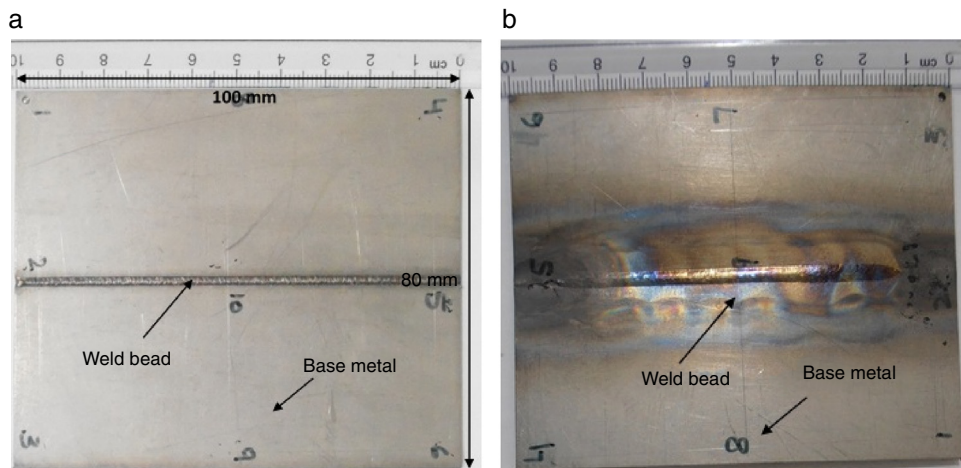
Ti–5Al–2.5Sn plates: (a) laser welded and (b) TIG welded.
